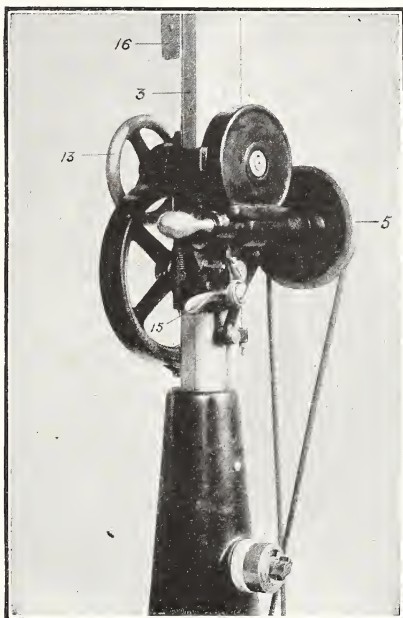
Detail of lower portion of machine shown in Figure 14, illustrating stepped pulley, gear drive, and releasing mechanism
